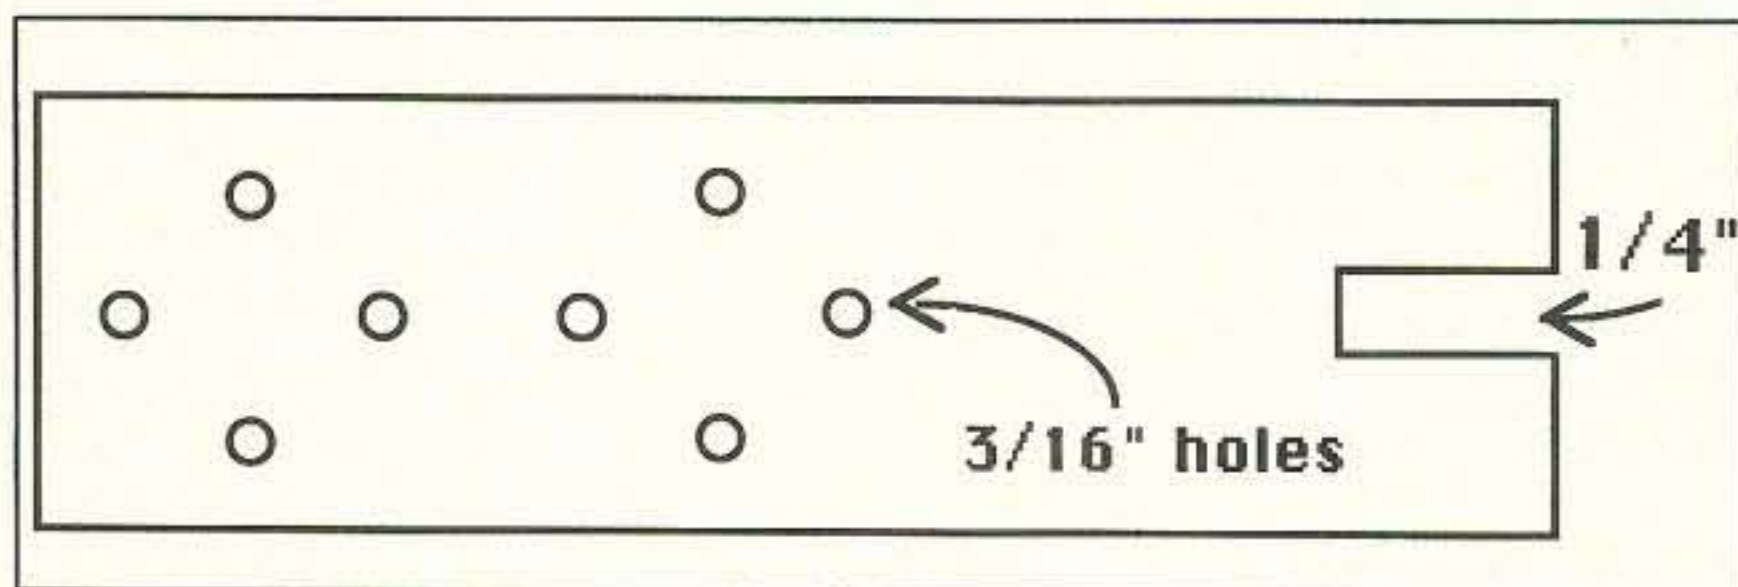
Approximate locations of the bracket mounting holes and the slot for the C-clamp in the mounting board.
